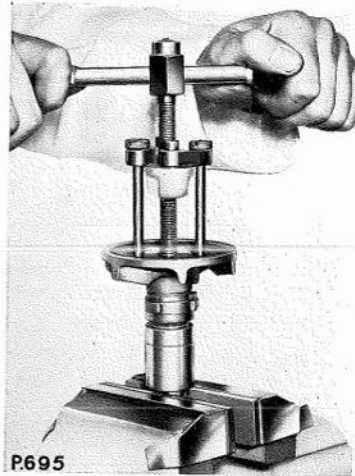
Removing the impellor, using the Churchill Tool 155, in conjunction with the adaptor set 155-6
